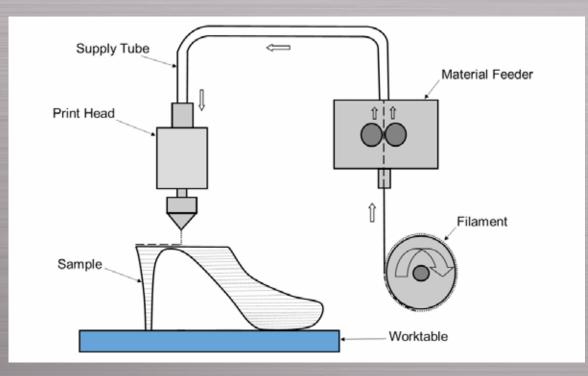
Illustration showing innovative use of welding technology for 3D printing.
